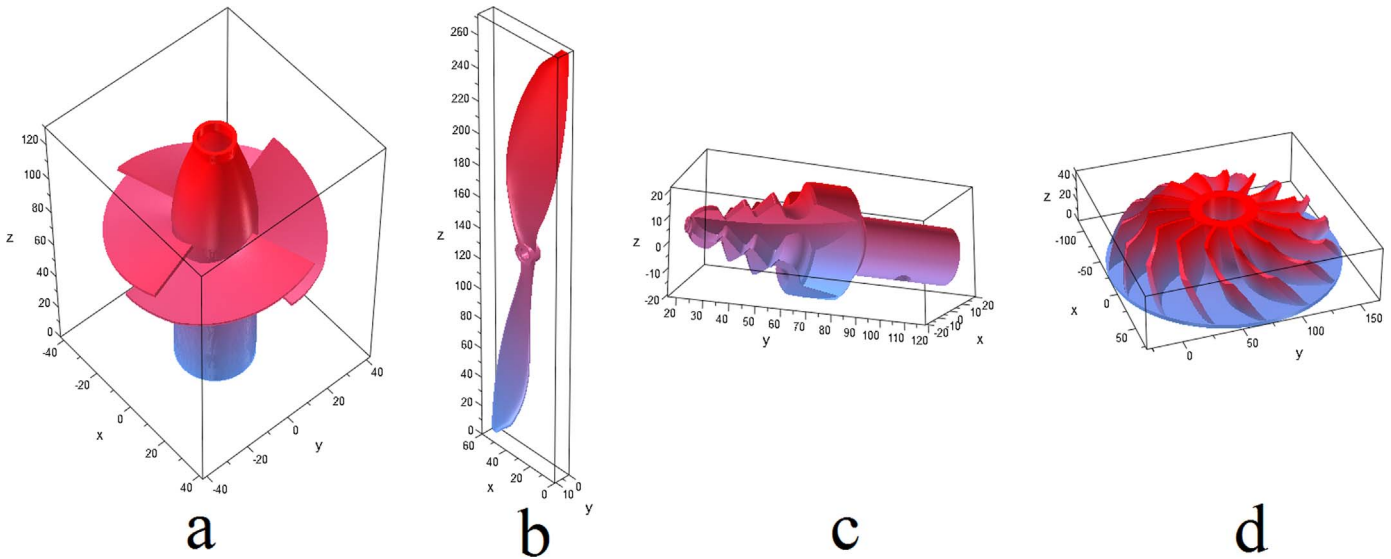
Revolved part: (a) propeller a, (b) blade, (c) cutter head, (d) propeller .
